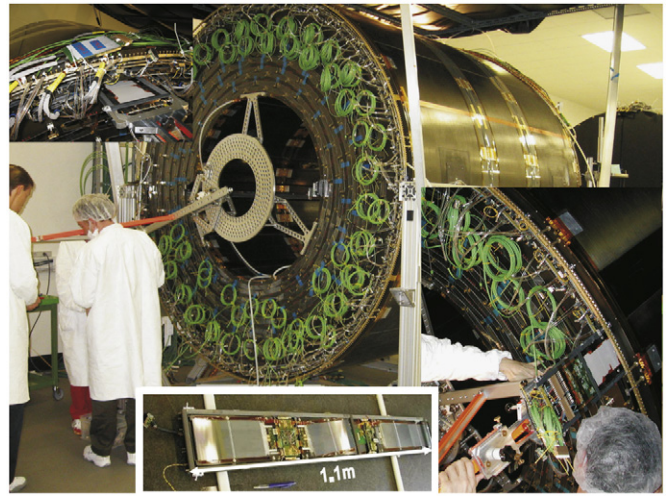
Rod insertion into TOB. The main picture gives a good overview of the size and complexity of the TOB. A special tool guarantees a safe insertion. A rod is displayed at the bottom [33].
